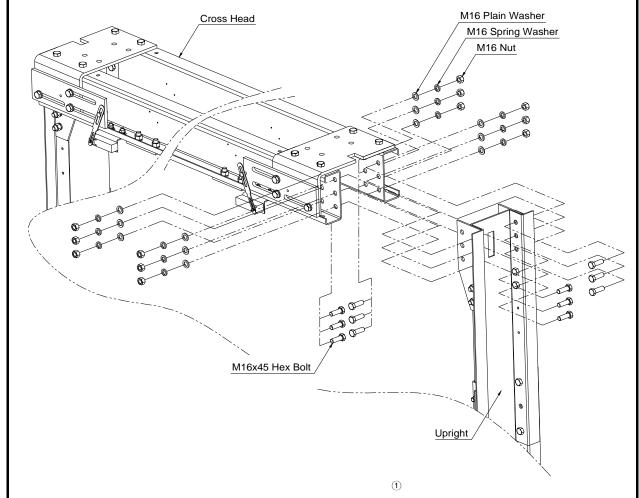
CROSSHEAD INSTALLATION (Underslung Skewed type)
